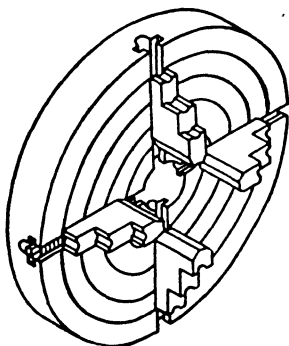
Four-jawed independent chuck with reversible jaws.
